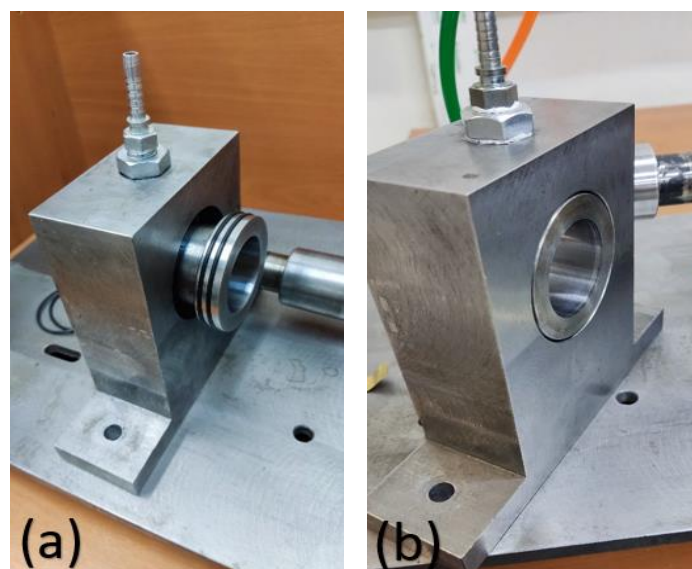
Schematic of the second air bearing design (a) before and (b) after assembly
